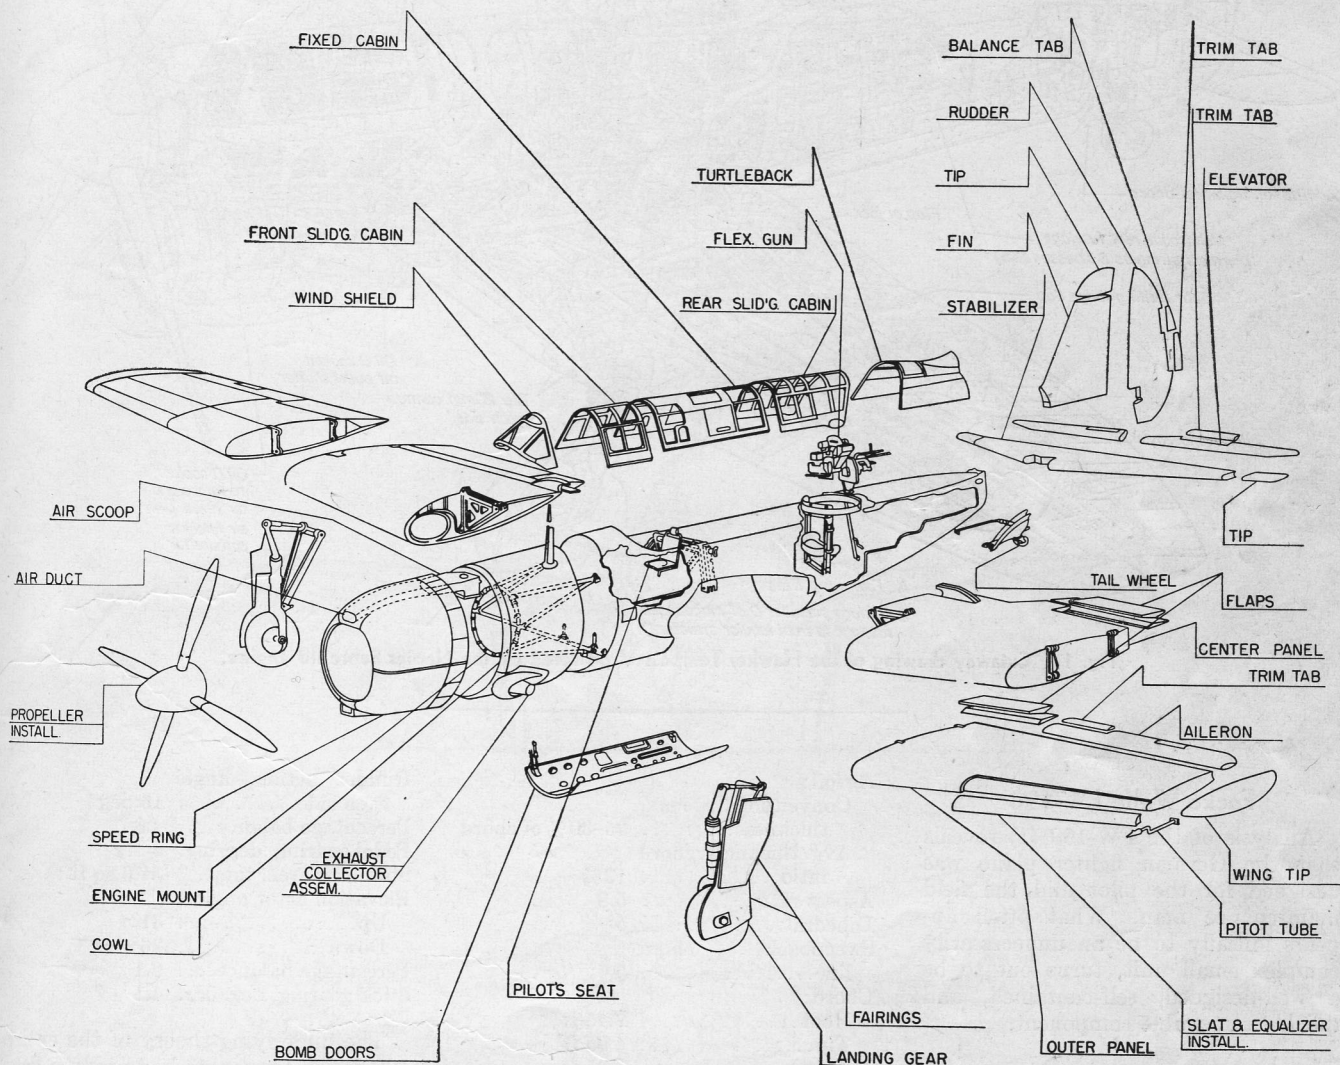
Exploded view of Curtiss SB2C Helldiver carrier-borne dive and torpedo bomber, showing major assemblies.
